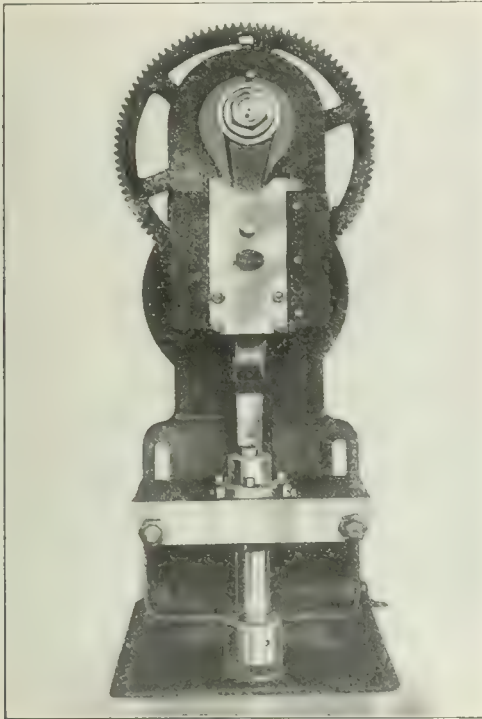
Front View of a Power Sprue Cutter Built by J. C. Busch, Milwaukee, Wis.
